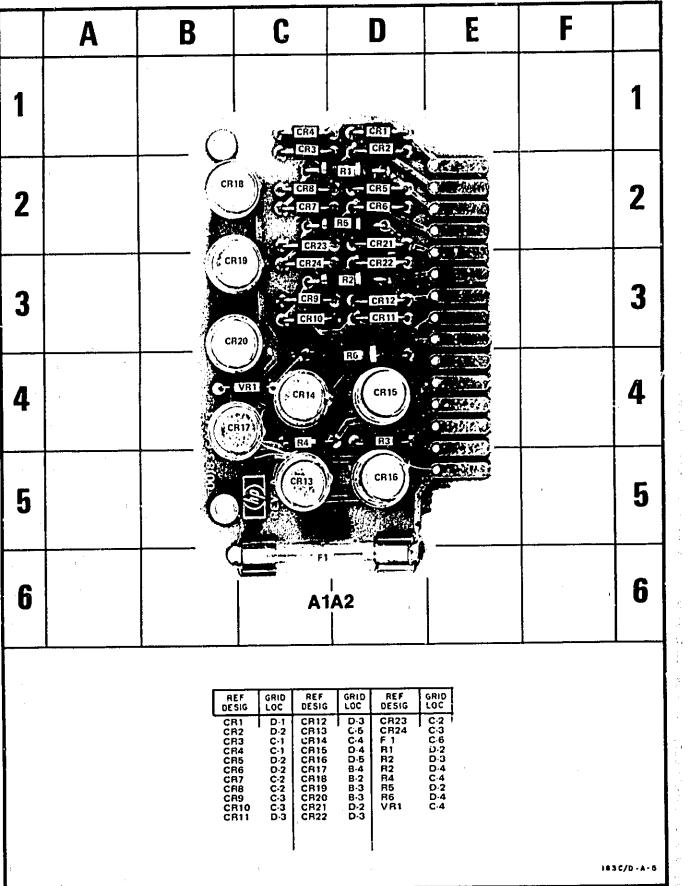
Component Locations, LVPS Rectifier Board A1A2
